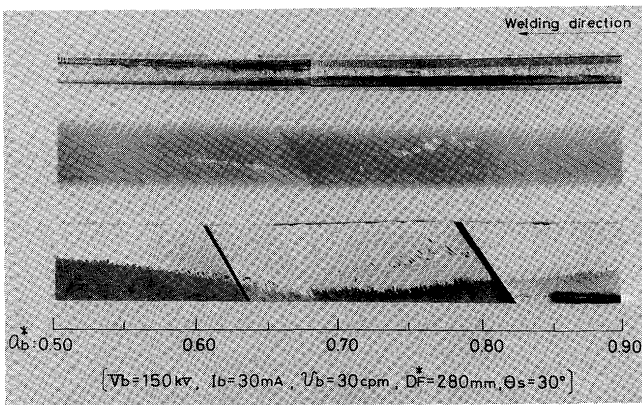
Bead appearance (top side), radiograph (middle) and longitudinal-section (bottom side) of SUS27 beam welds.
